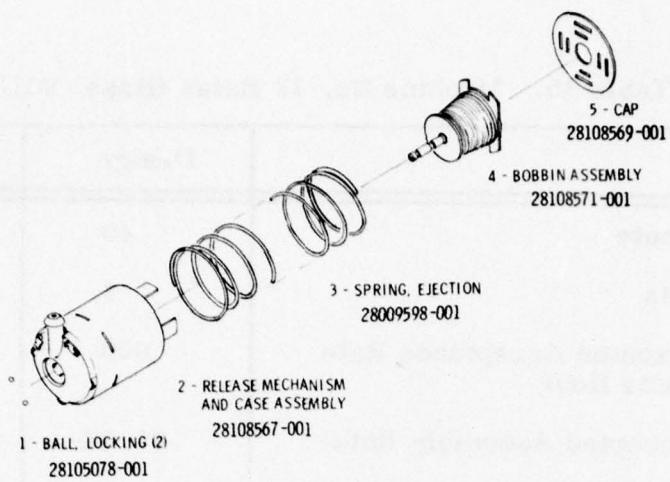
Machine No. 12 - Sensor Case and Bobbin Assembly
